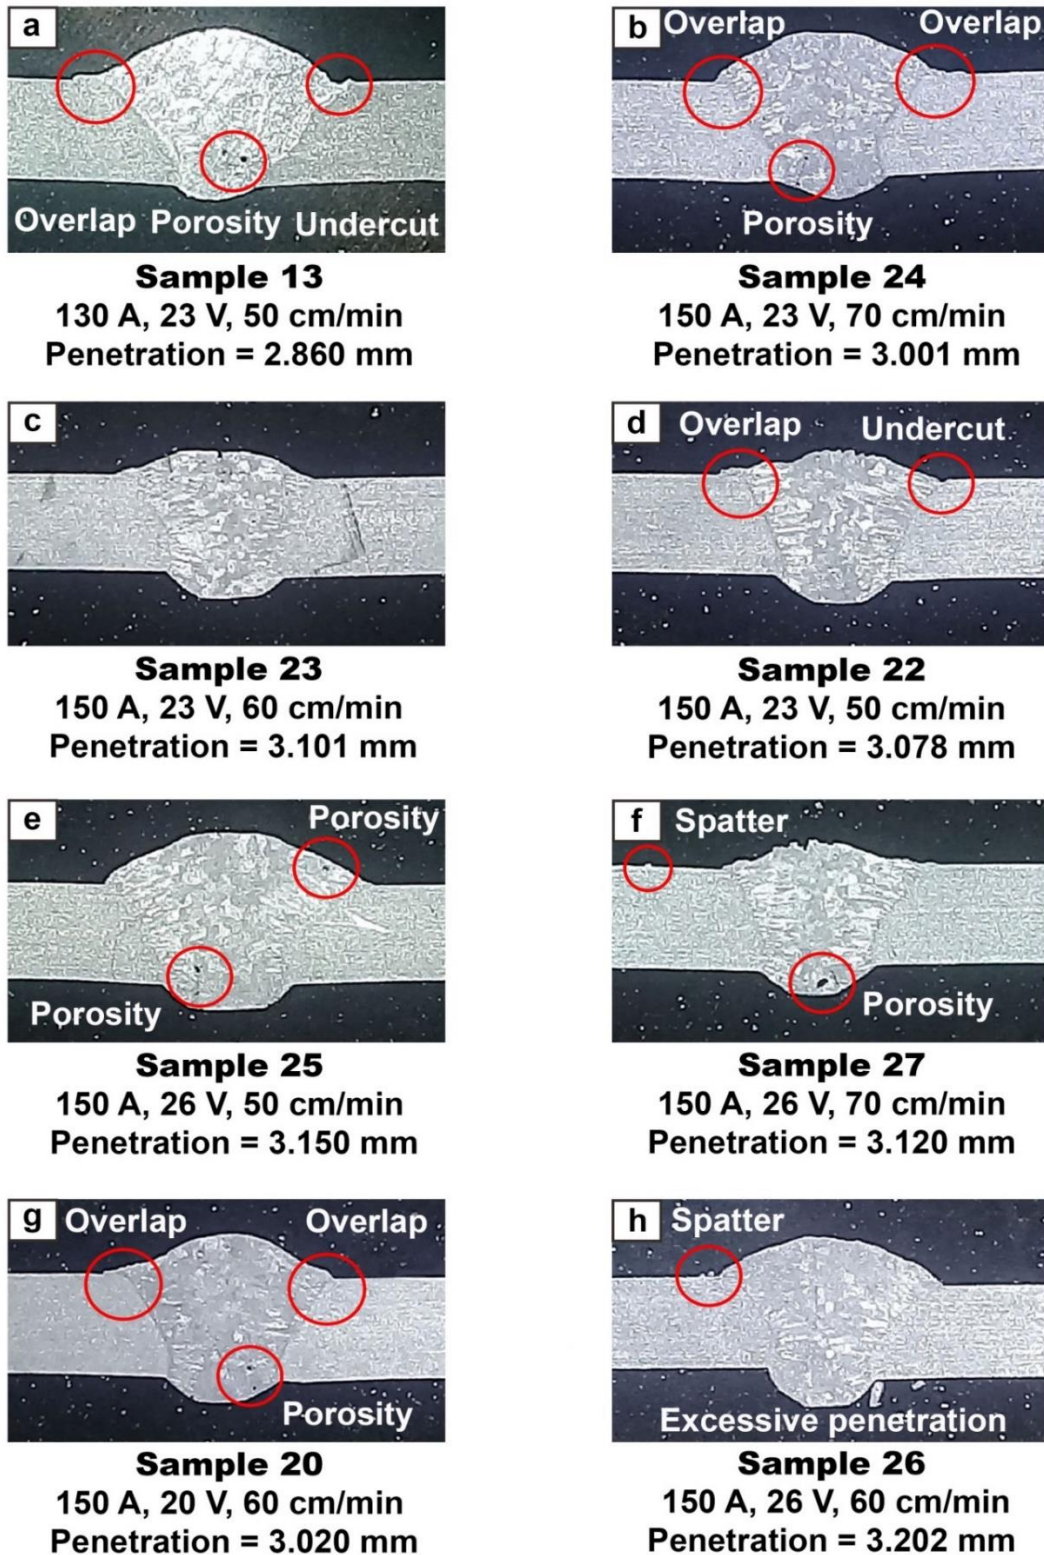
Cross-section of welded joints in AA6061 aluminum alloy.
